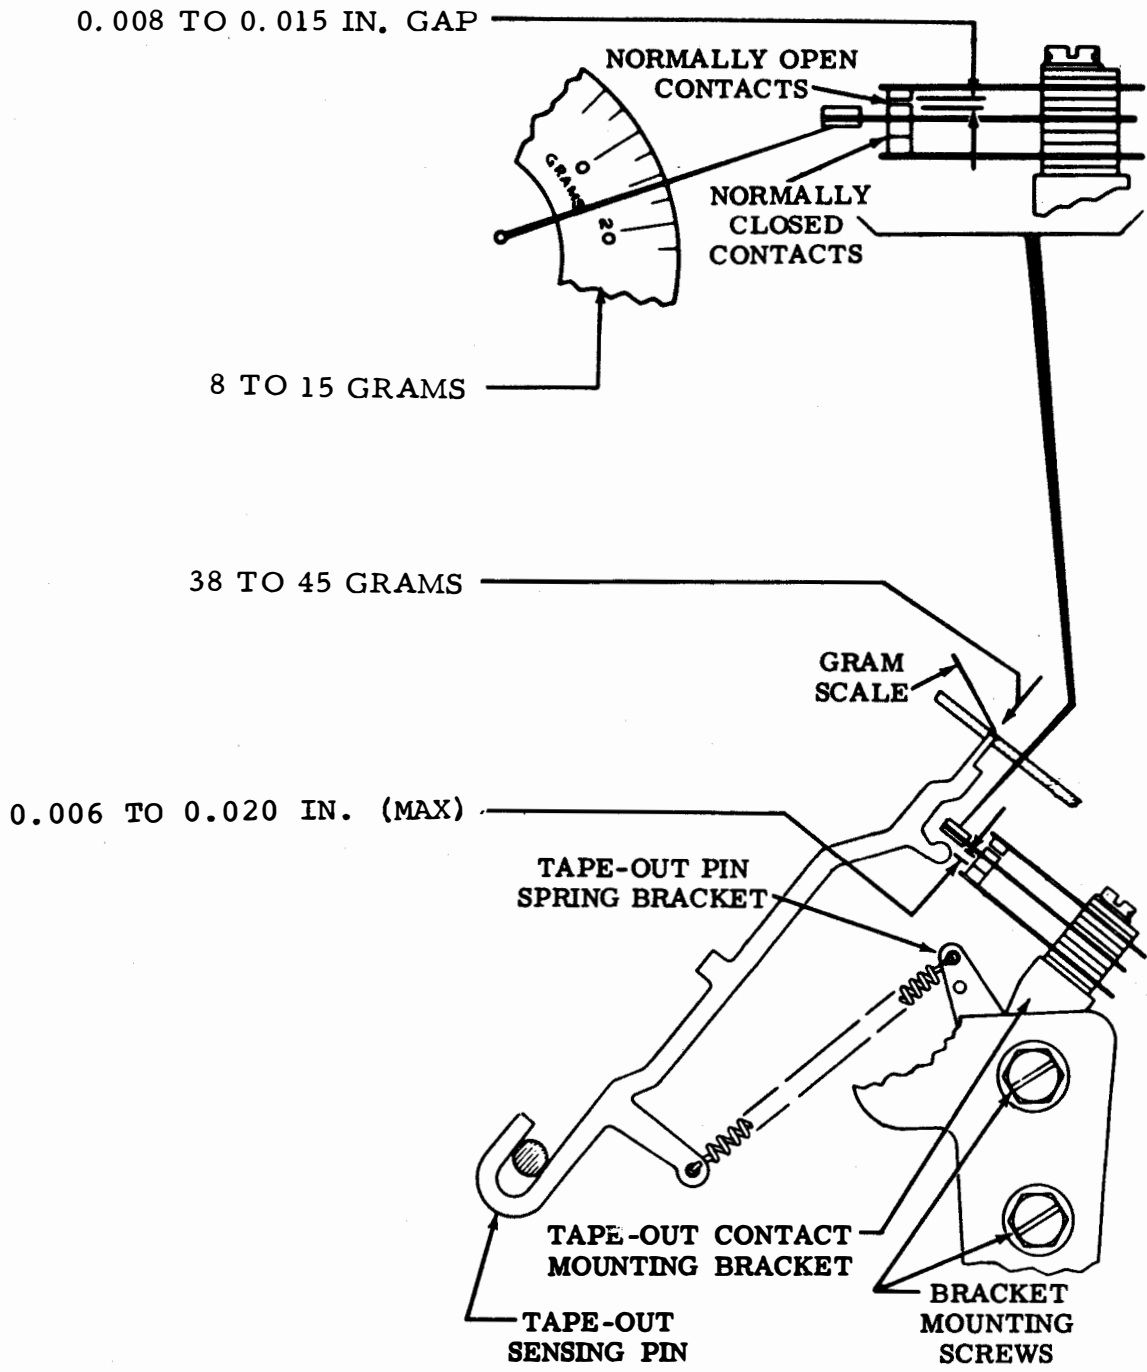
Tape-Out Contact Assembly, Tape-Out Sensing Pin Spring, and Tape-Out Contact Bracket, Front View
